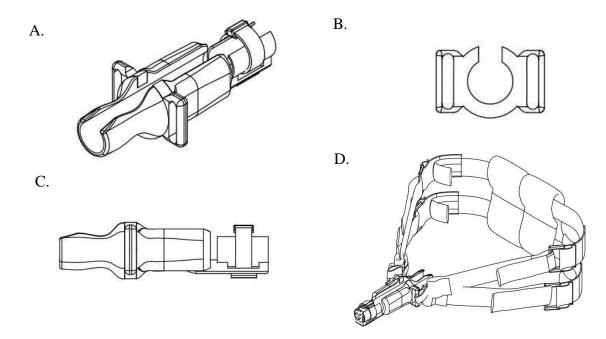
The Endotracheal Tube Holder (ETH) with securing straps and pressure padding. A. The ETH assembly, without the strap. B. ETH wing. The wing rotates around that axis of the ETH body. C. Side view of the assembly. D. Full ETH assembly, including the straps. This shows the ETH in its dual strap configuration. A single strap variation is not shown.
